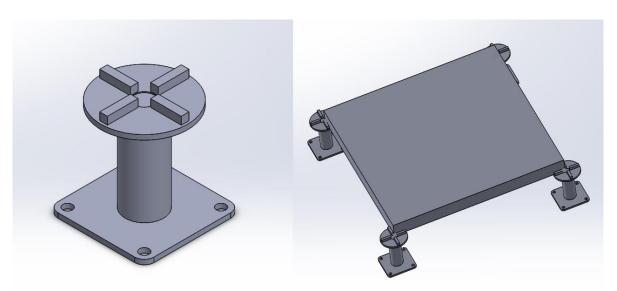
Initial design for the pedestal unit (left) and the raised access floor system (right)
